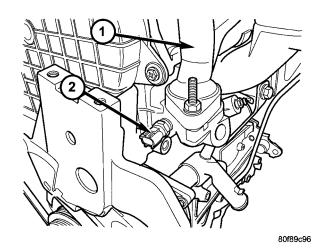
Engine Coolant Temperature Sensor - 2.4L Turbo
